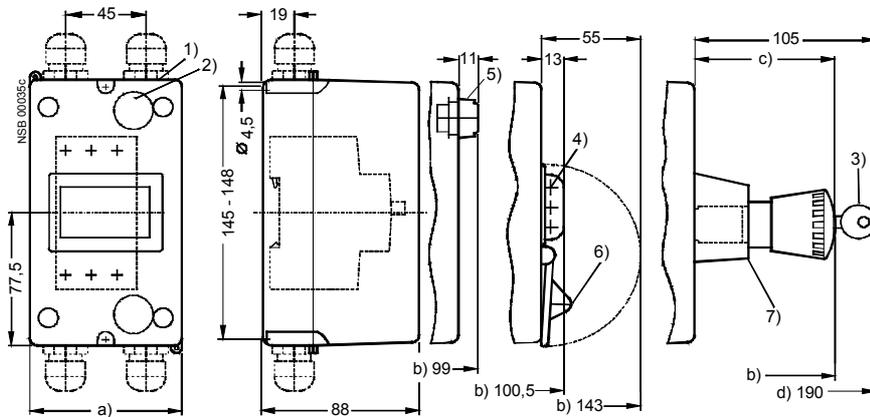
3RV19 13-1.... (for Frame size S00)
